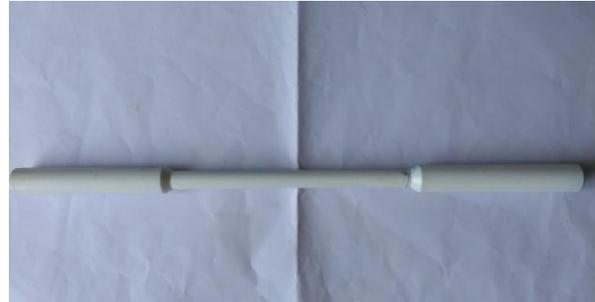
Specimen of coated (Spray Coating With Sand Blasting)
